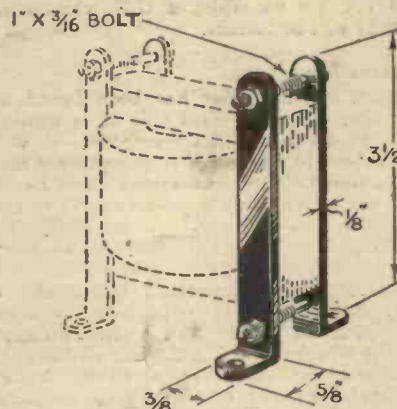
The above drawing shows how the transformer core clamps may be made.
